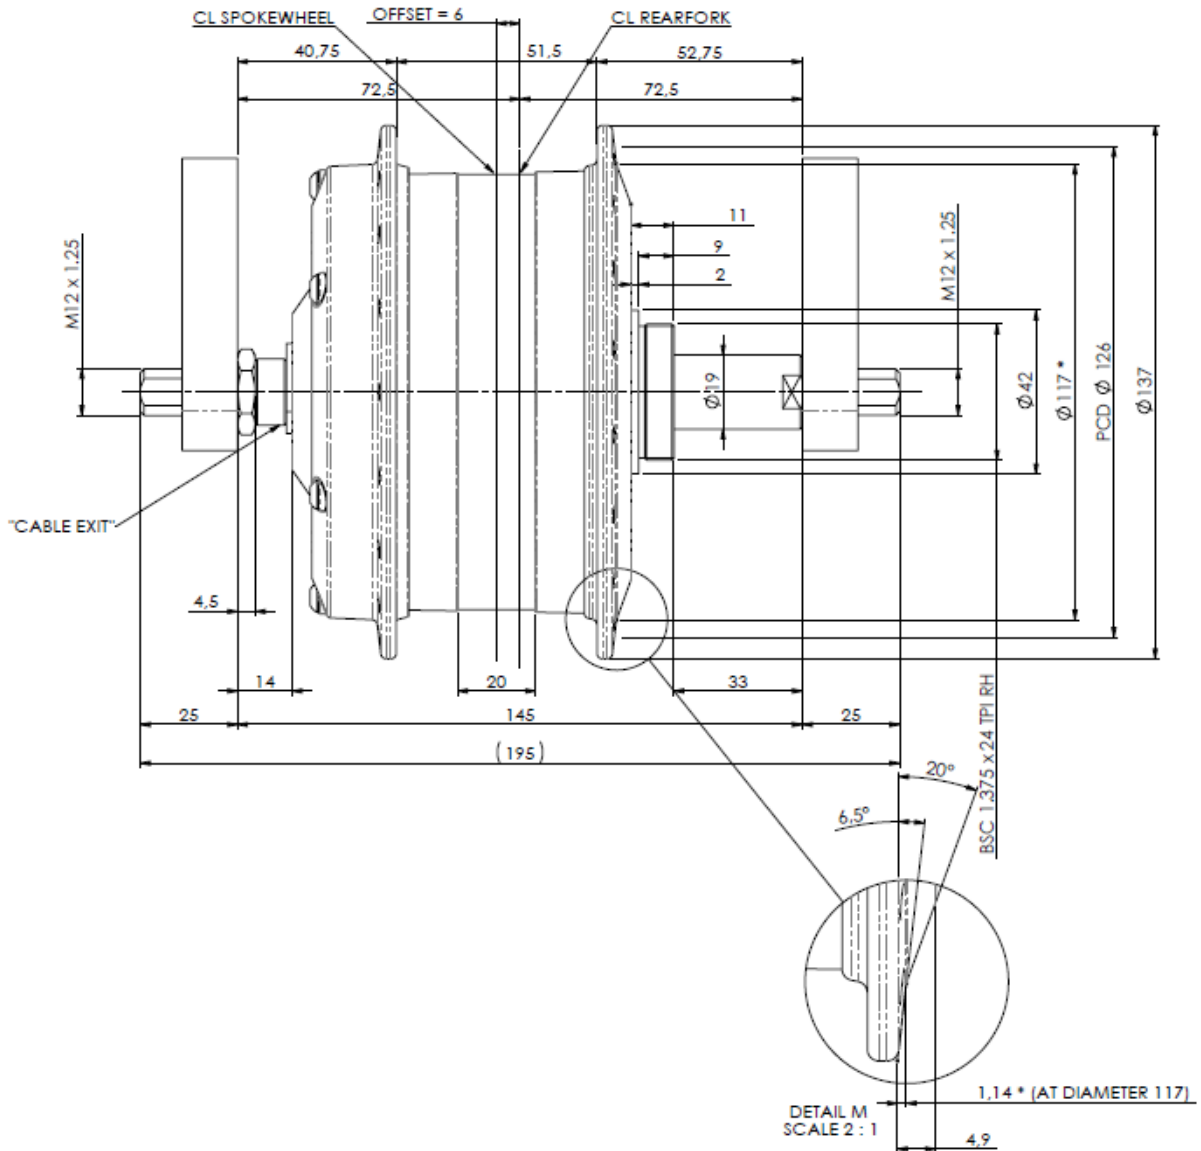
High Torque Rear Wheel version with Sprocket Cassette interface
